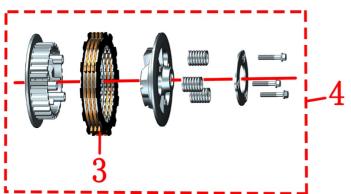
RIGHT CRANKCASE COVER ASSEMBLY		Clutch assembly-2	CHK	Q
